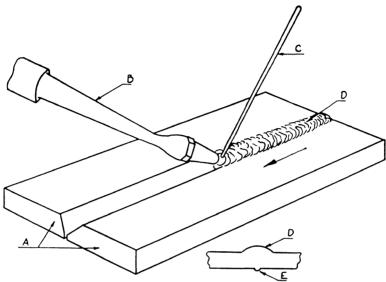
"Backward" method of welding heavy plate: A. Bare metal, B. Torch, C. Filler rod, D. Build up, E. Penetration
